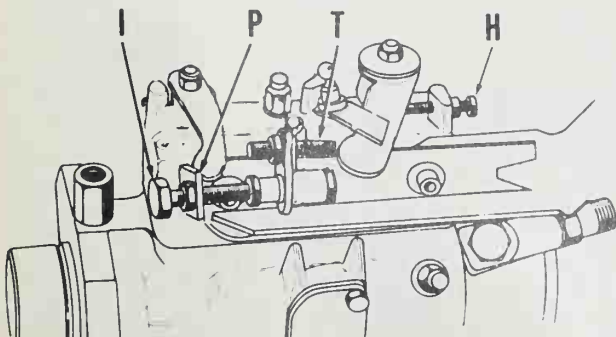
Drawing showing location of idle speed screw (I) and high speed screw (H) on fixed speed engines with Roto Diesel injection pump. Refer to text for adjustment.
